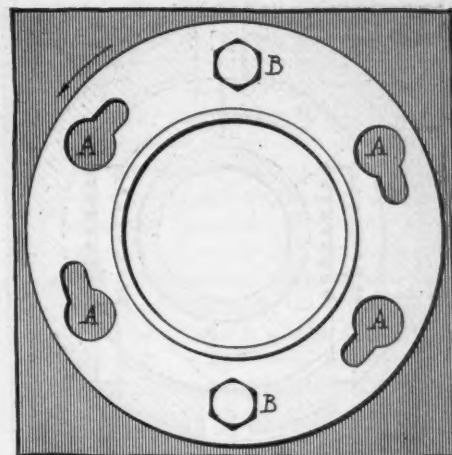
SWIFT DEMOUNTABLE WHEEL
